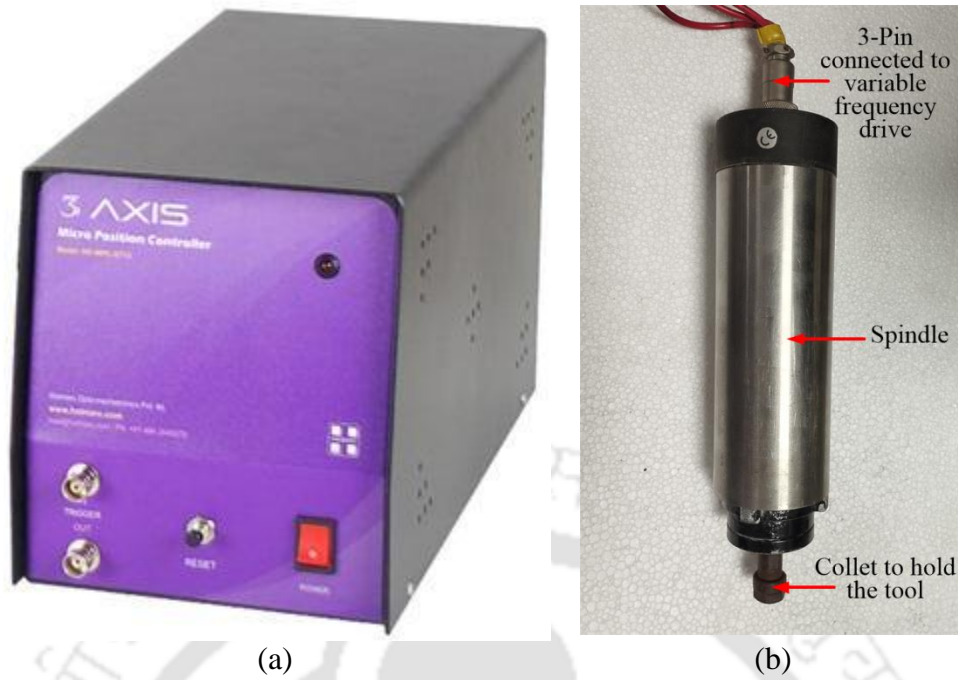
(a) Micro position controller and (b) spindle to rotate the microtool
